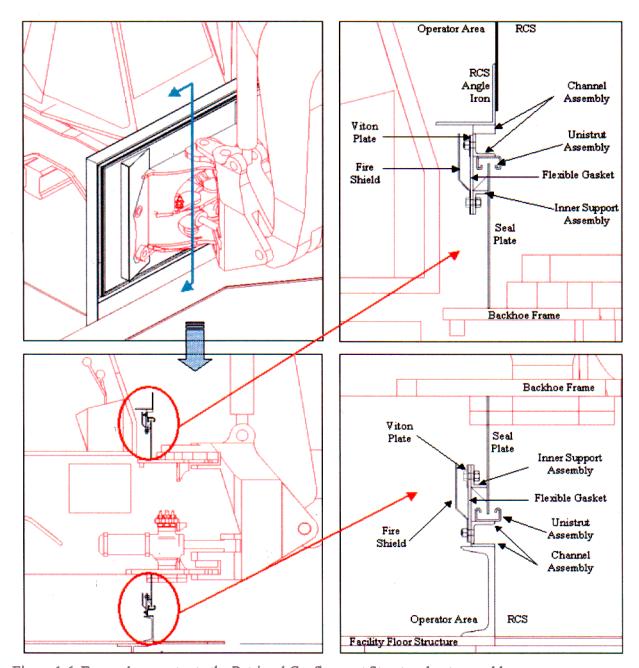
External excavator to the Retrieval Confinement Structure boot assembly.
